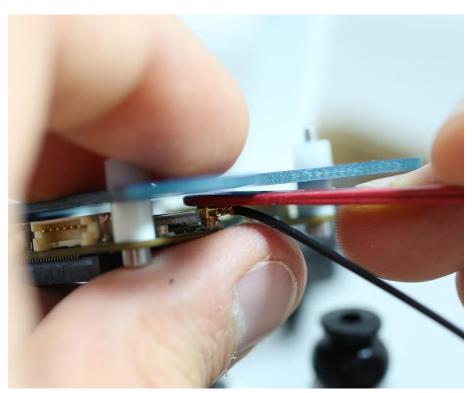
Attaching the Wi-Fi cable to the Snapdragon Flight™ board
